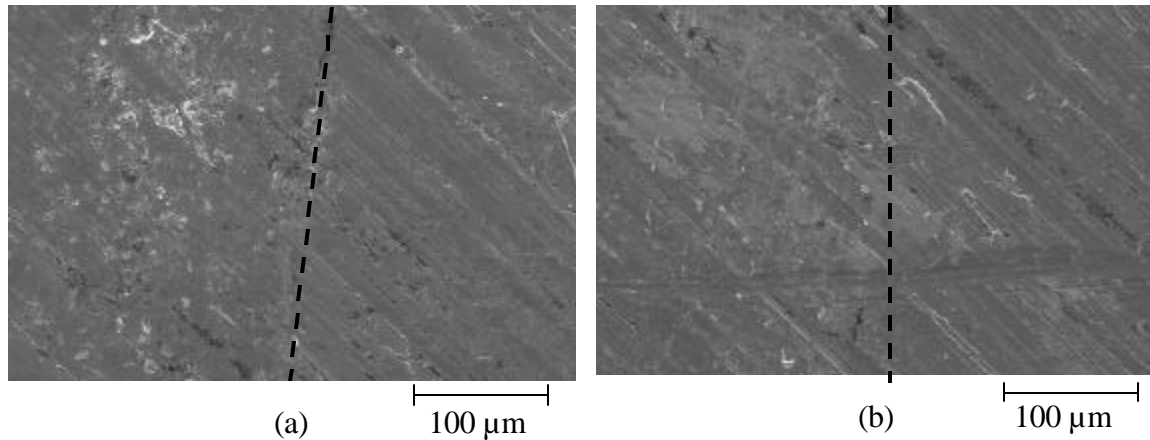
Two regions of a representative fretting scar from the unfailed end of a typical test specimen. a) Damage near the edge of the specimen. b) Damage near the center of the specimen. The loading axis is approximately horizontal.
